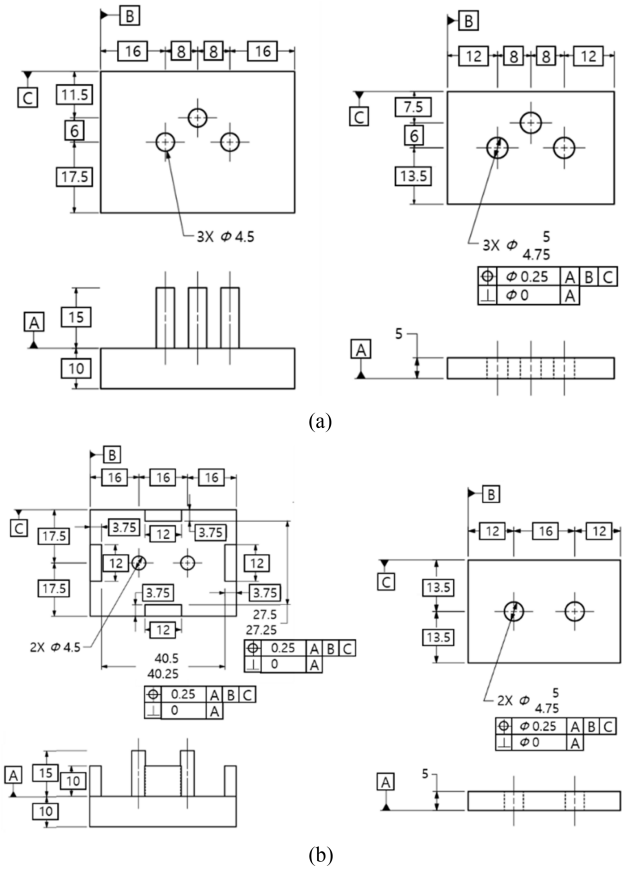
Drawings of two example designs shown in Fig. 10, with extra assembly features added. All numbers in [mm]
